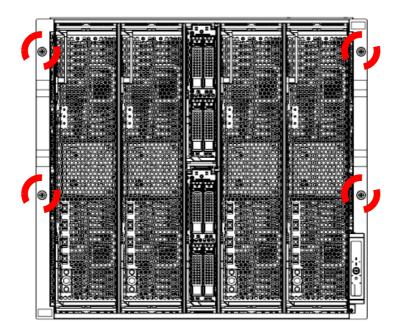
Four knob screws on the front side of C880 M4 cabinet
